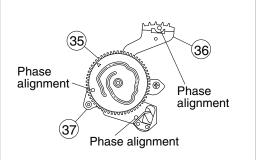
(b) Removing the Centering Arm Assembly ③
